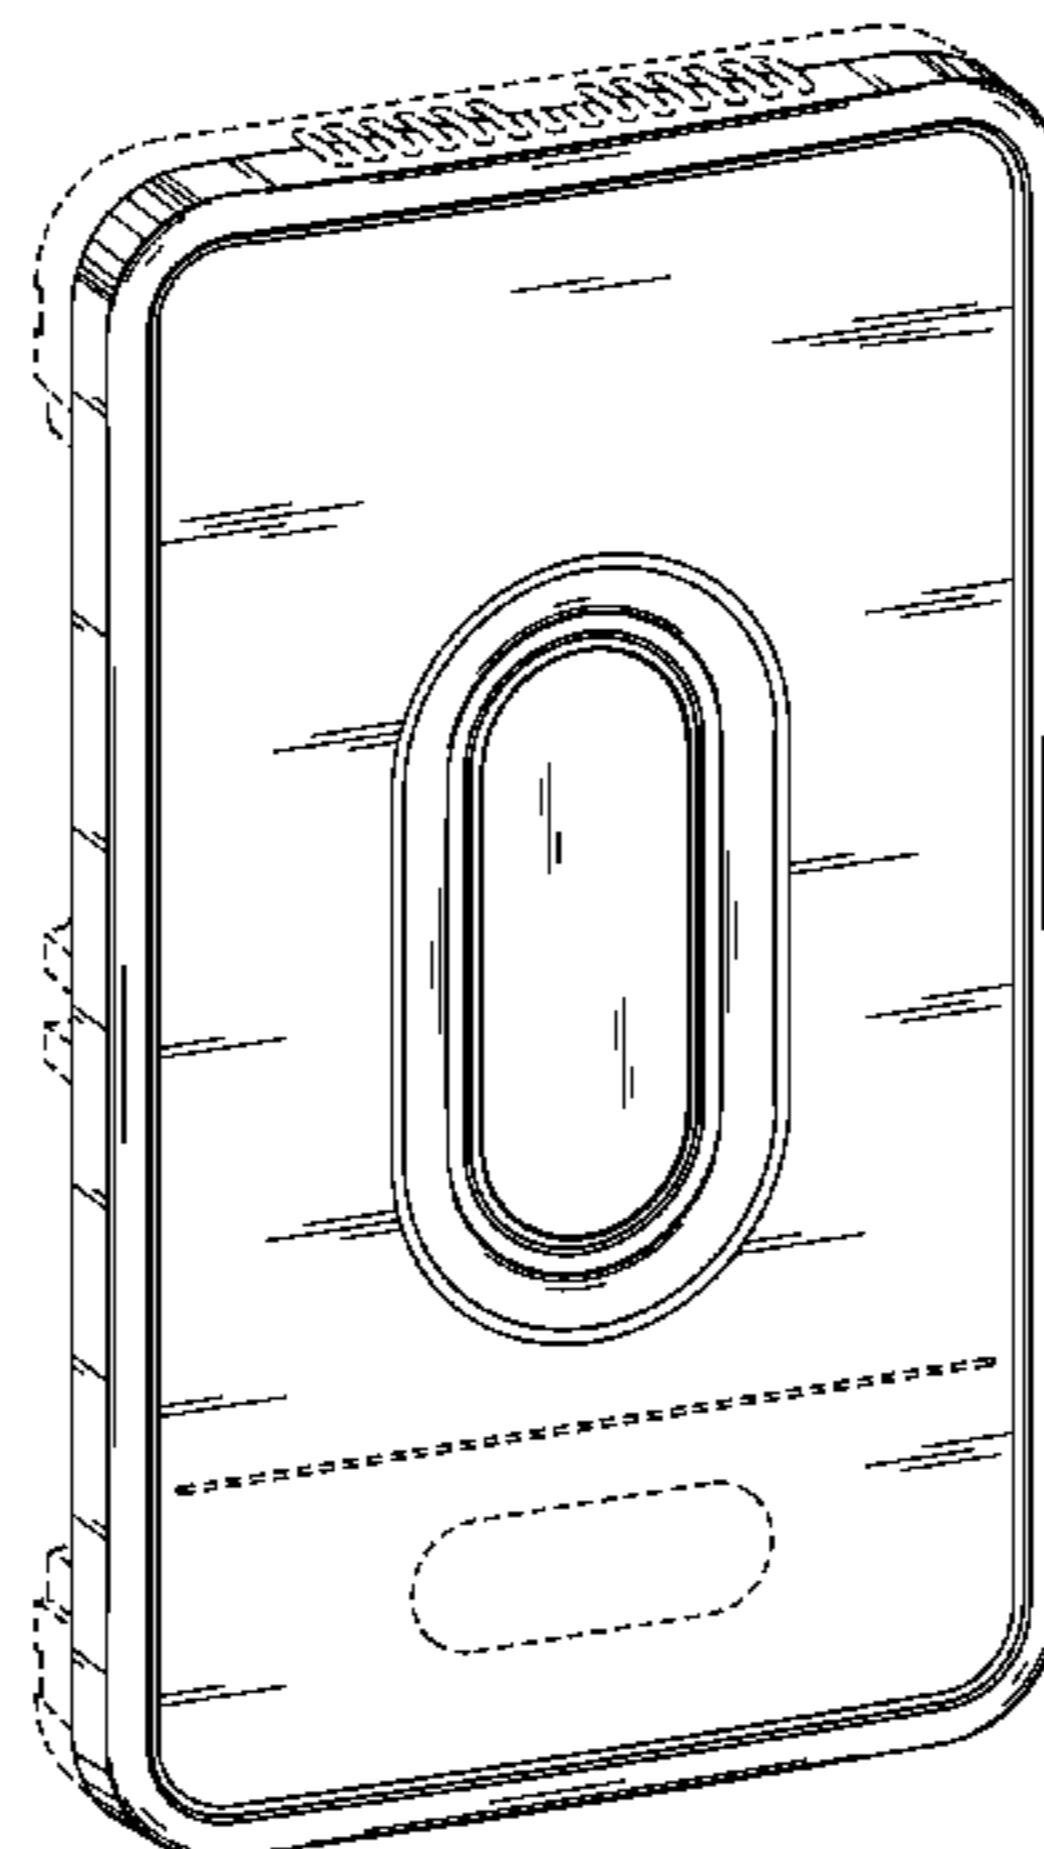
is a front elevation view of the first embodiment of the electrical equipment housing cover oriented with the top of the cover at the top of the page.
